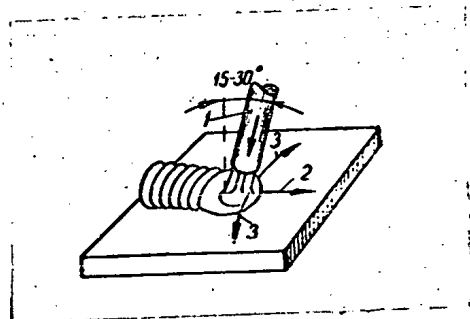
Schematic view of electrode end movement during welding.
